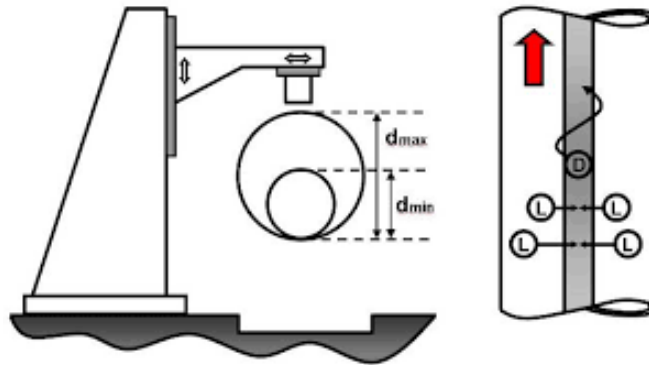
Testing setup for spiral pipe inspection. a) Machine frame (stand), b) cantilever beam (boom) with vertical adjustment, c) probe carriers with horizontal position adjustment, d) spiral SAW-pipe, and e) foundation with water drainage (closed water circuit).
